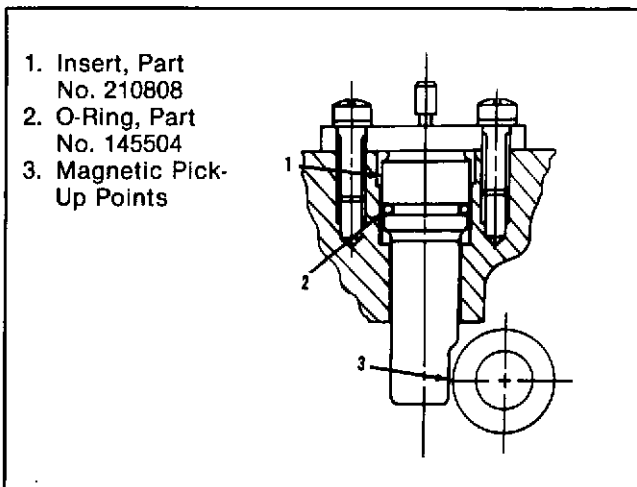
, (F5254). Insert assembly mounted in the fuel pump.
